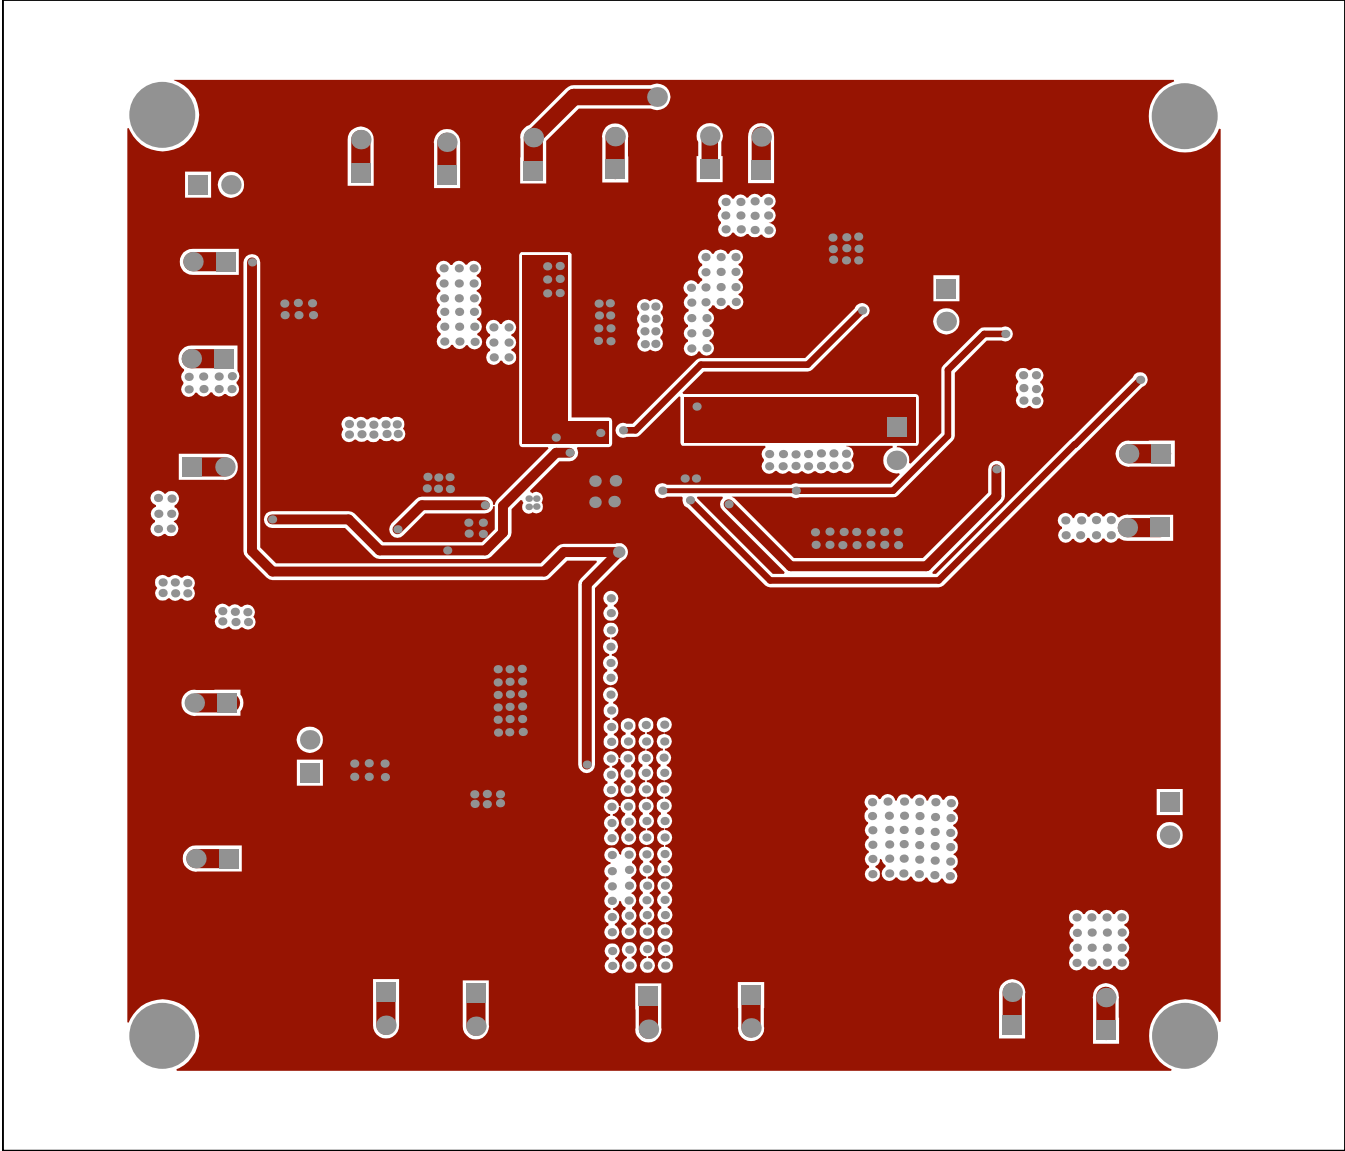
MAX20070 EV Kit PCB Layout—Solder Side
